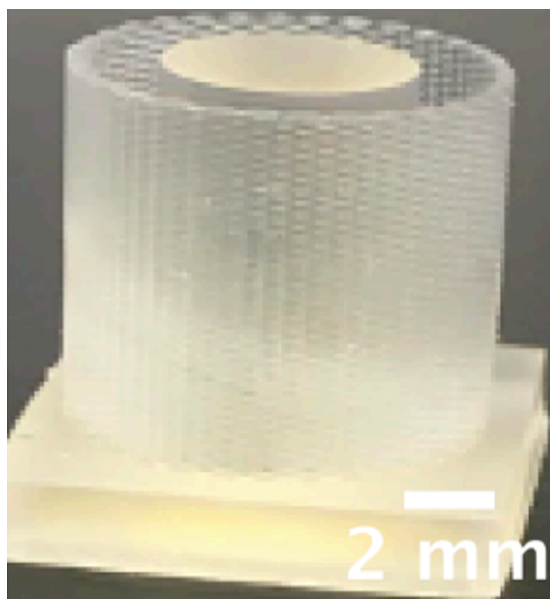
Finished solid cylindrical mold after printing with Formlabs standard High-Temperature V2 resin and post-processing. The solid cylindrical mold was printed with high accuracy and smooth finishes.
